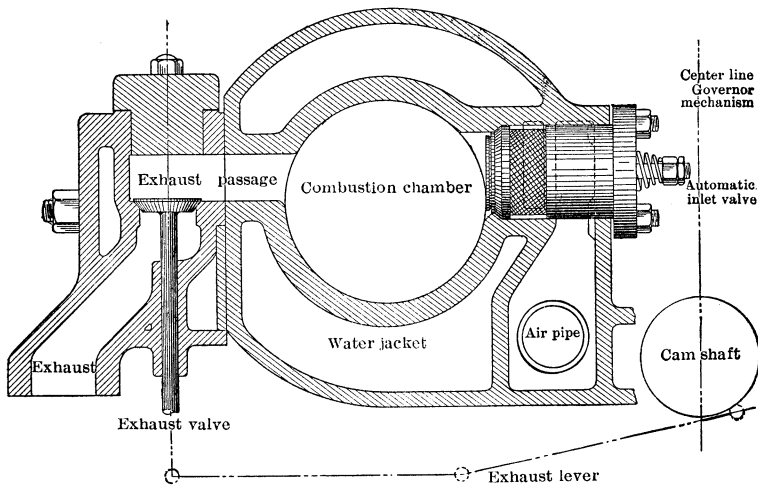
Vertical section through inlet and exhaust valves of Otto gasoline engine.
